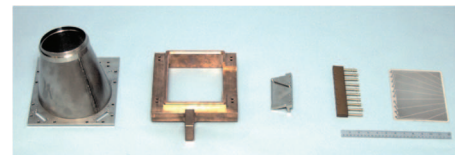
(Color) Exploded view of the sFLIP in-vessel components, showing (left to right) the conical light shield, copper frame, aperture block, Faraday cup spring contact assembly, and the scintillator plate. A 30 cm ruler is shown below the scintillator plate for scale.
